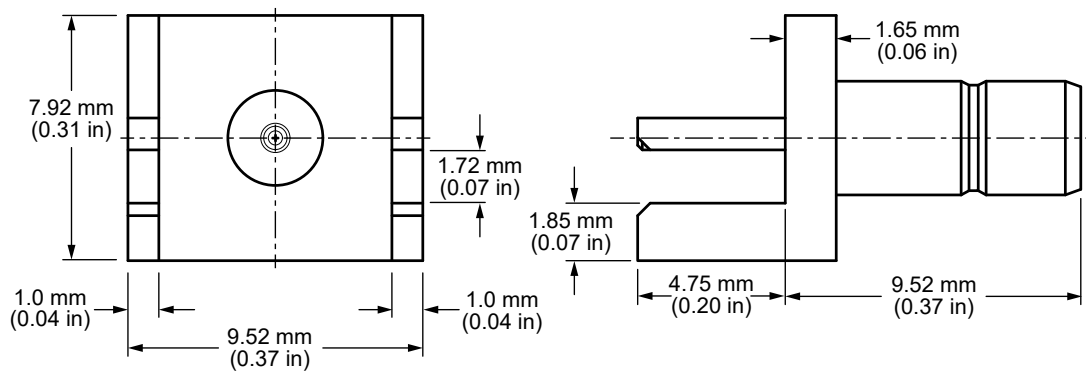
Product Dimensions for the CONSMB003.062-G Connector
